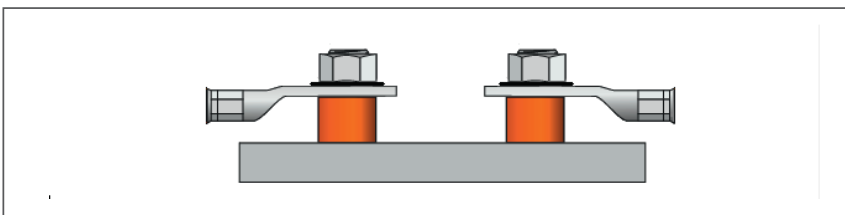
HV+ power cables, fasten the ring terminals with M8 nuts
